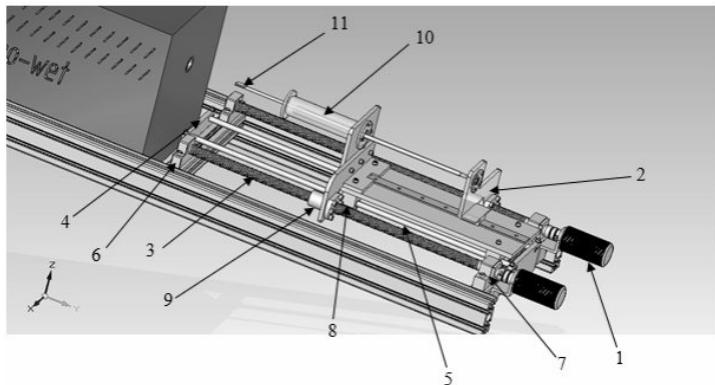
Designed charging-discharging system (1 – stepper motor, 2 – base, 3 – screw bullets (Train), 4 – supporting block fence, 5 – linear guide, 6 – bearing block rack (site maintenance), 7 – bearing block rack (drive side), 8 – linear bearings in the housing, 9 – nut bullets, 10 – prechamber, 11 – measuring table)
